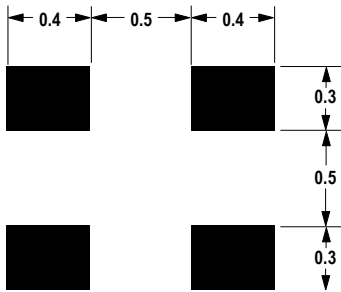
PCB Pad Layout, MiniPak (dimensions in mm).
